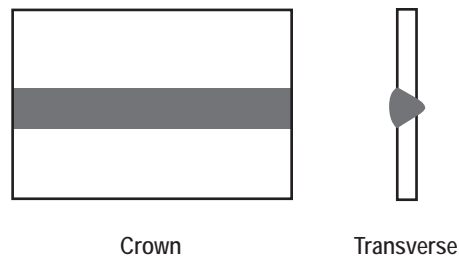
Weld sample cut prior to mounting, polishing, and etching to reveal structure.
